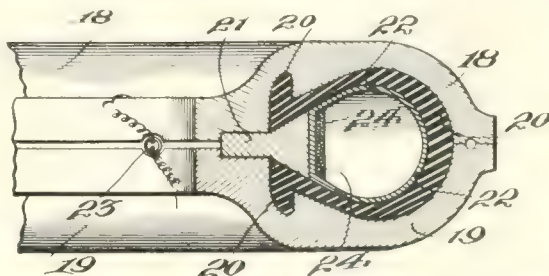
Mold for curing Clincher Tires. Description: 18, 19, upper and lower halves of mold; 20, clincher tire; 21, key piece; 22, inflating bag; 23, valve stem; 24, single magnetizing and heating coil with wires running through valve stem.
